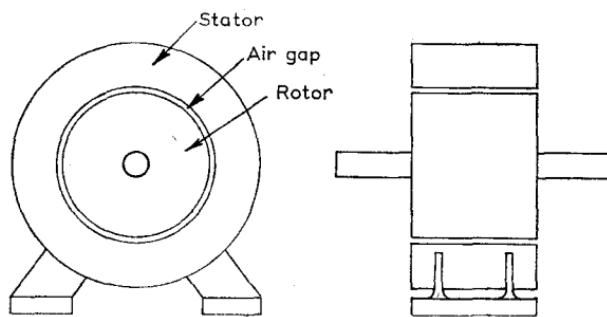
BASIC ARRANGEMENT OF A ROTATING MACHINE
